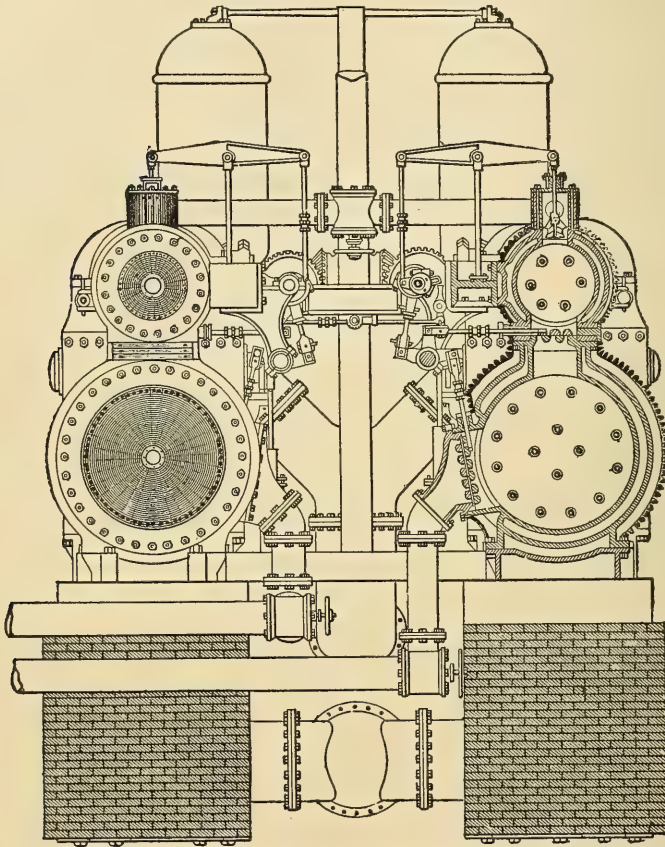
EXTERNAL AND SECTIONAL END VIEWS OF STEAM CYLINDERS.—Holly-Gaskill Pumping Engine, Saratoga Springs Water Works.
